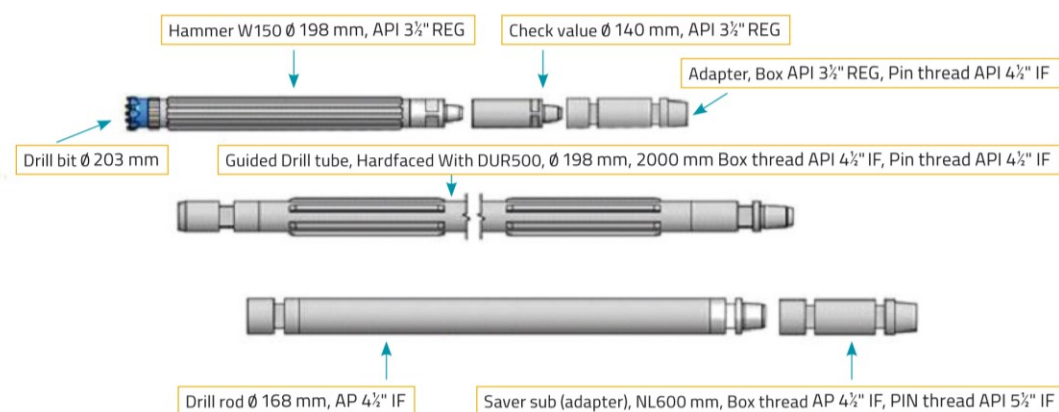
Bottom hole assembly of drill string for water powered hammer drilling.
